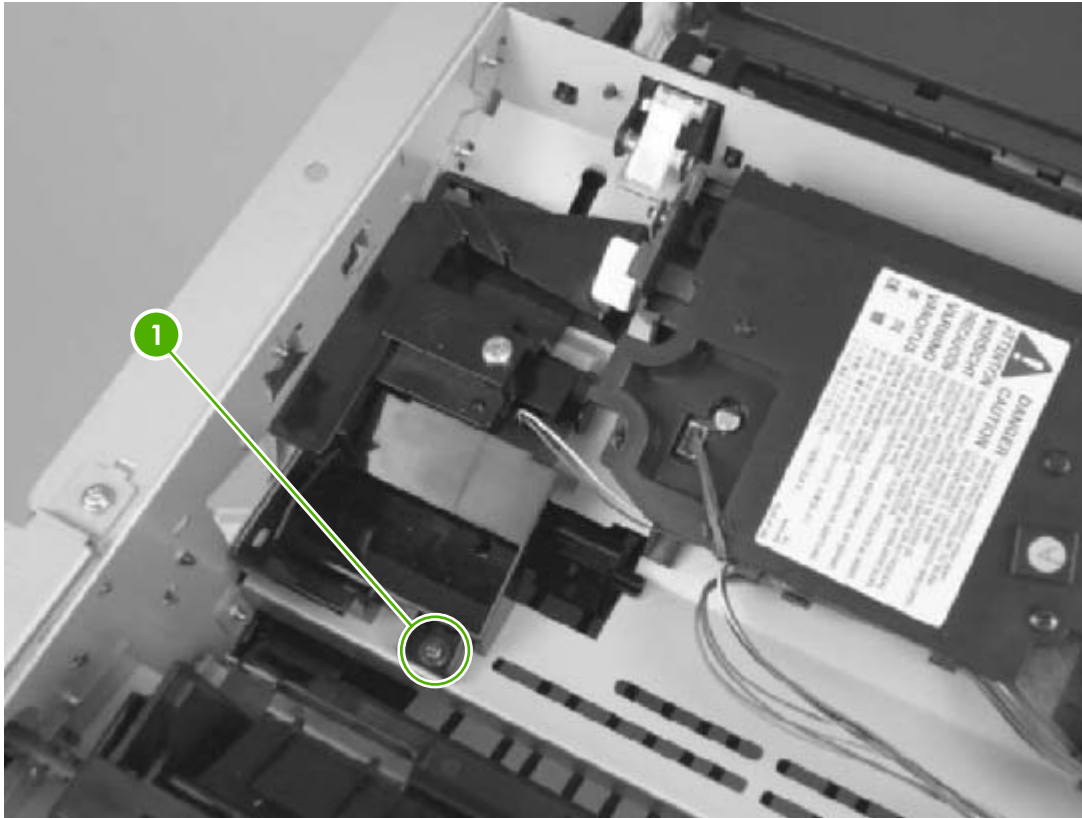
Removing the memory-tag-reader assembly (2 of 2)
